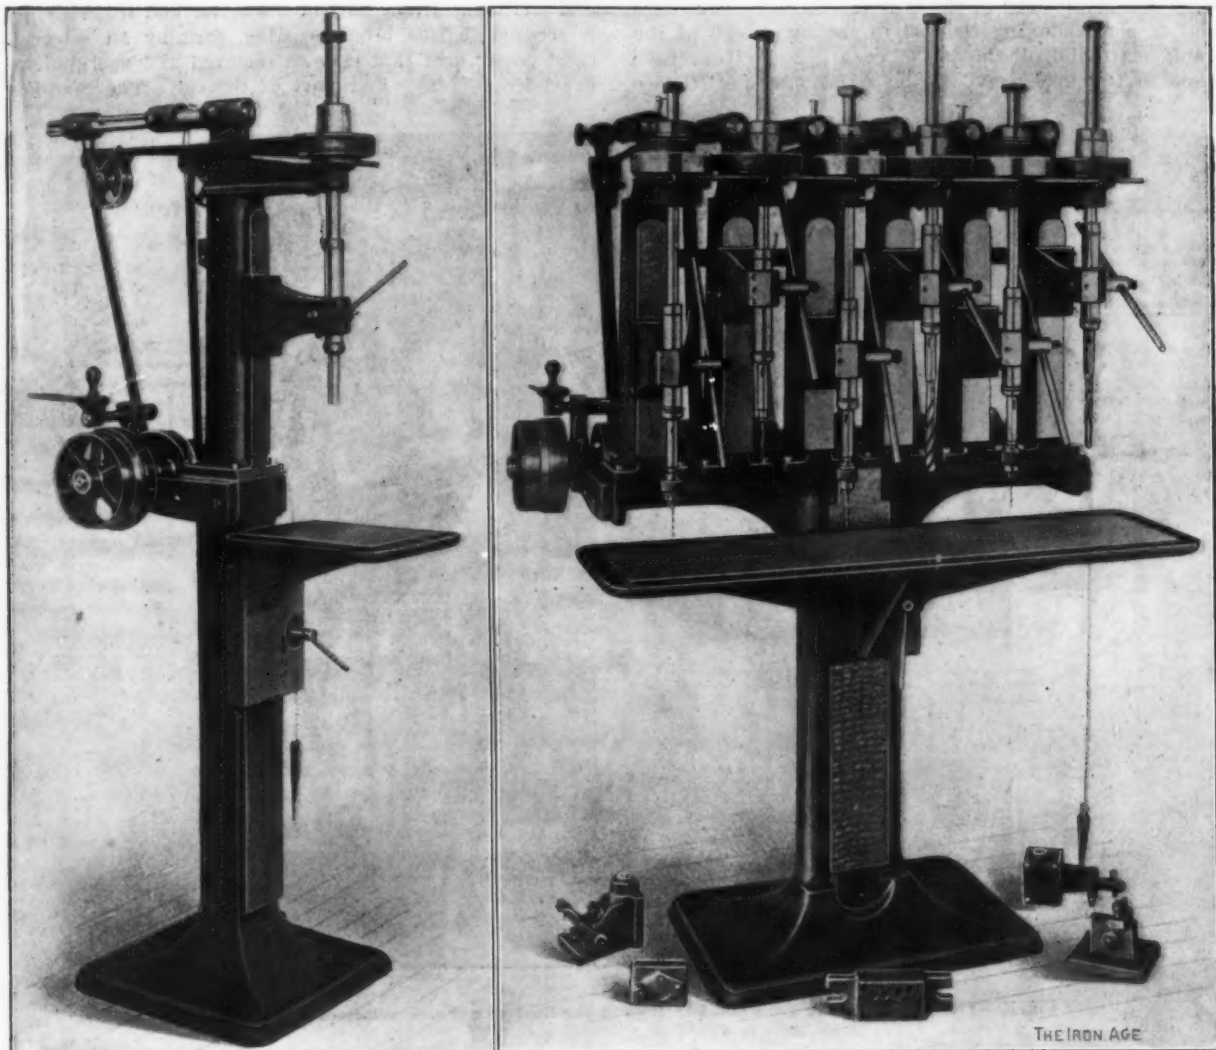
A Single Spindle and a Six-Spindle Sensitive Drill Adapted to Use High Speed Steel Drills.
